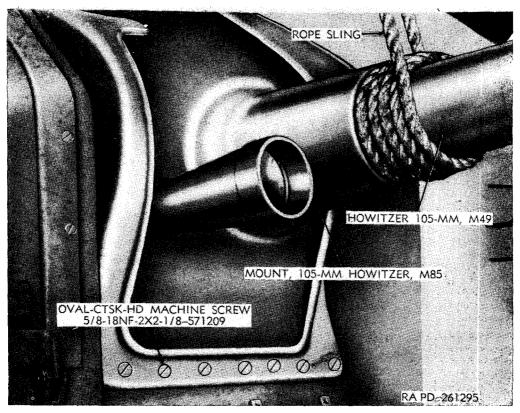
Howitzer M49 and mount M85 installed with attaching screws secured.
